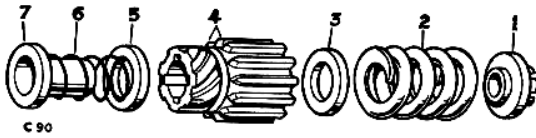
Layout of starter drive, 1955-58 Petrol models.
